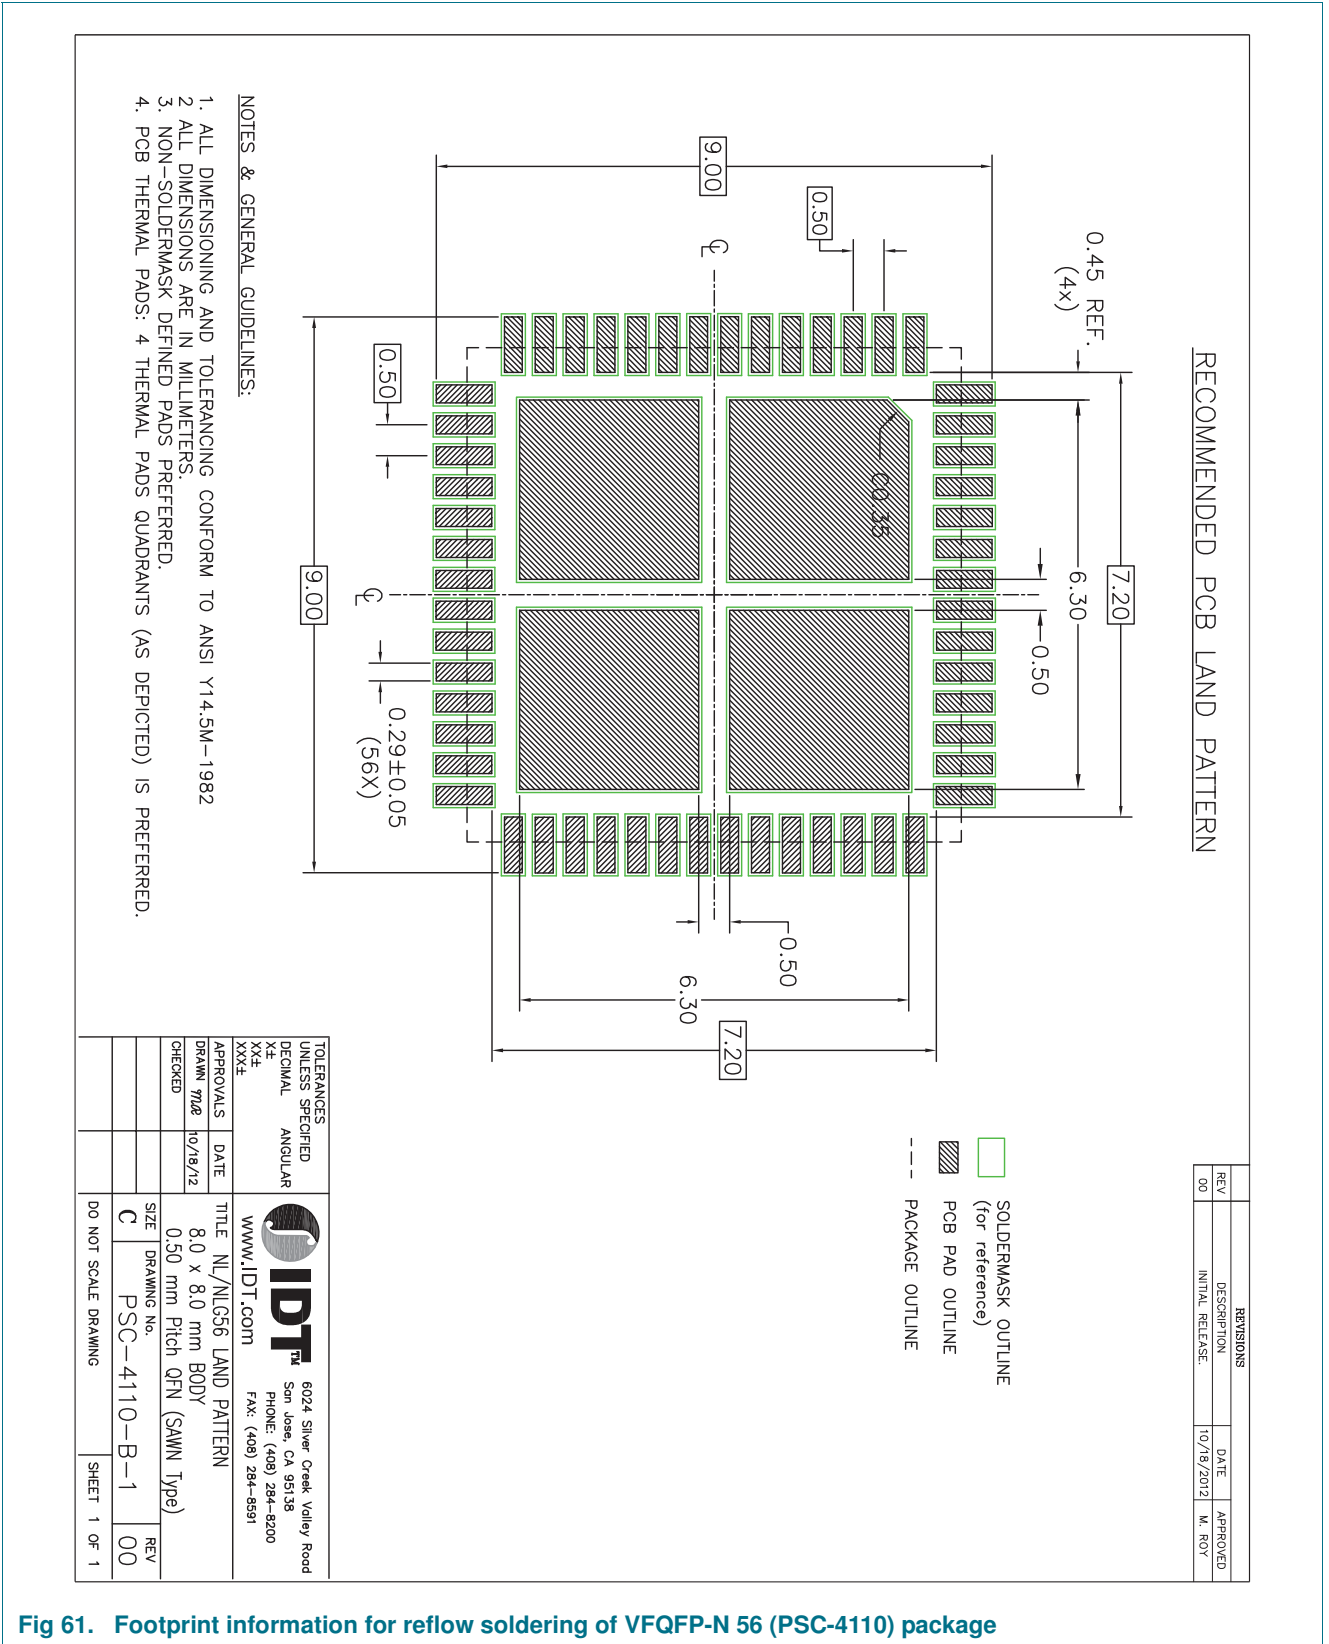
Footprint information for reflow soldering of VFQFP-N 56 (PSC-4110) package
